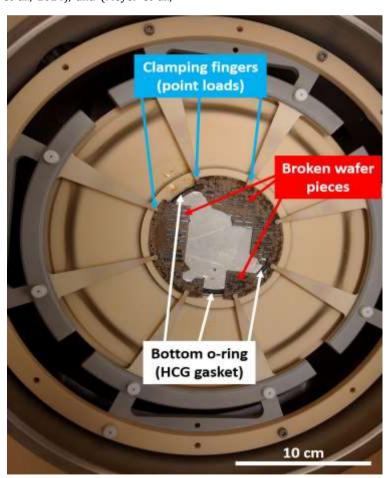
Top-down view of the inner side of the ICP etching tool process chamber that has a broken wafer. For the demonstration of the possible issues, broken wafer pieces are still clamped under the 8 clamping fingers (8 point loads) of the ICP etch tool. (HCG: helium cooling gas to cool the wafer from the back side of the wafer).
